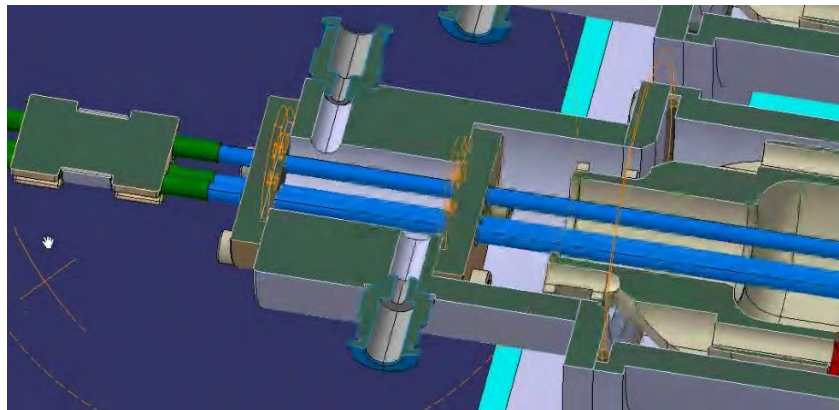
Cross-sectional view of the sealing chamber at the HV Wires side.
